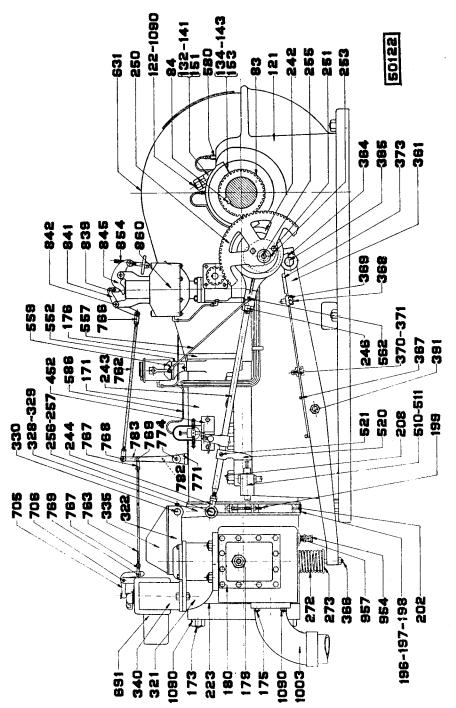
Gas Engine. Right Hand Side View. (Cylinder Size 121/4-17)
